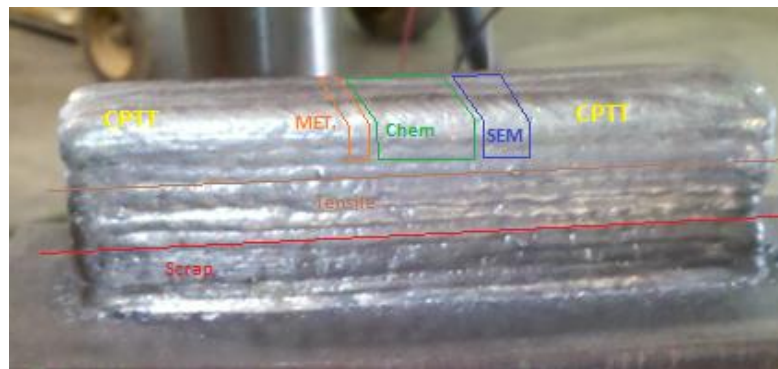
Sample locations in multi-pass weld build up
